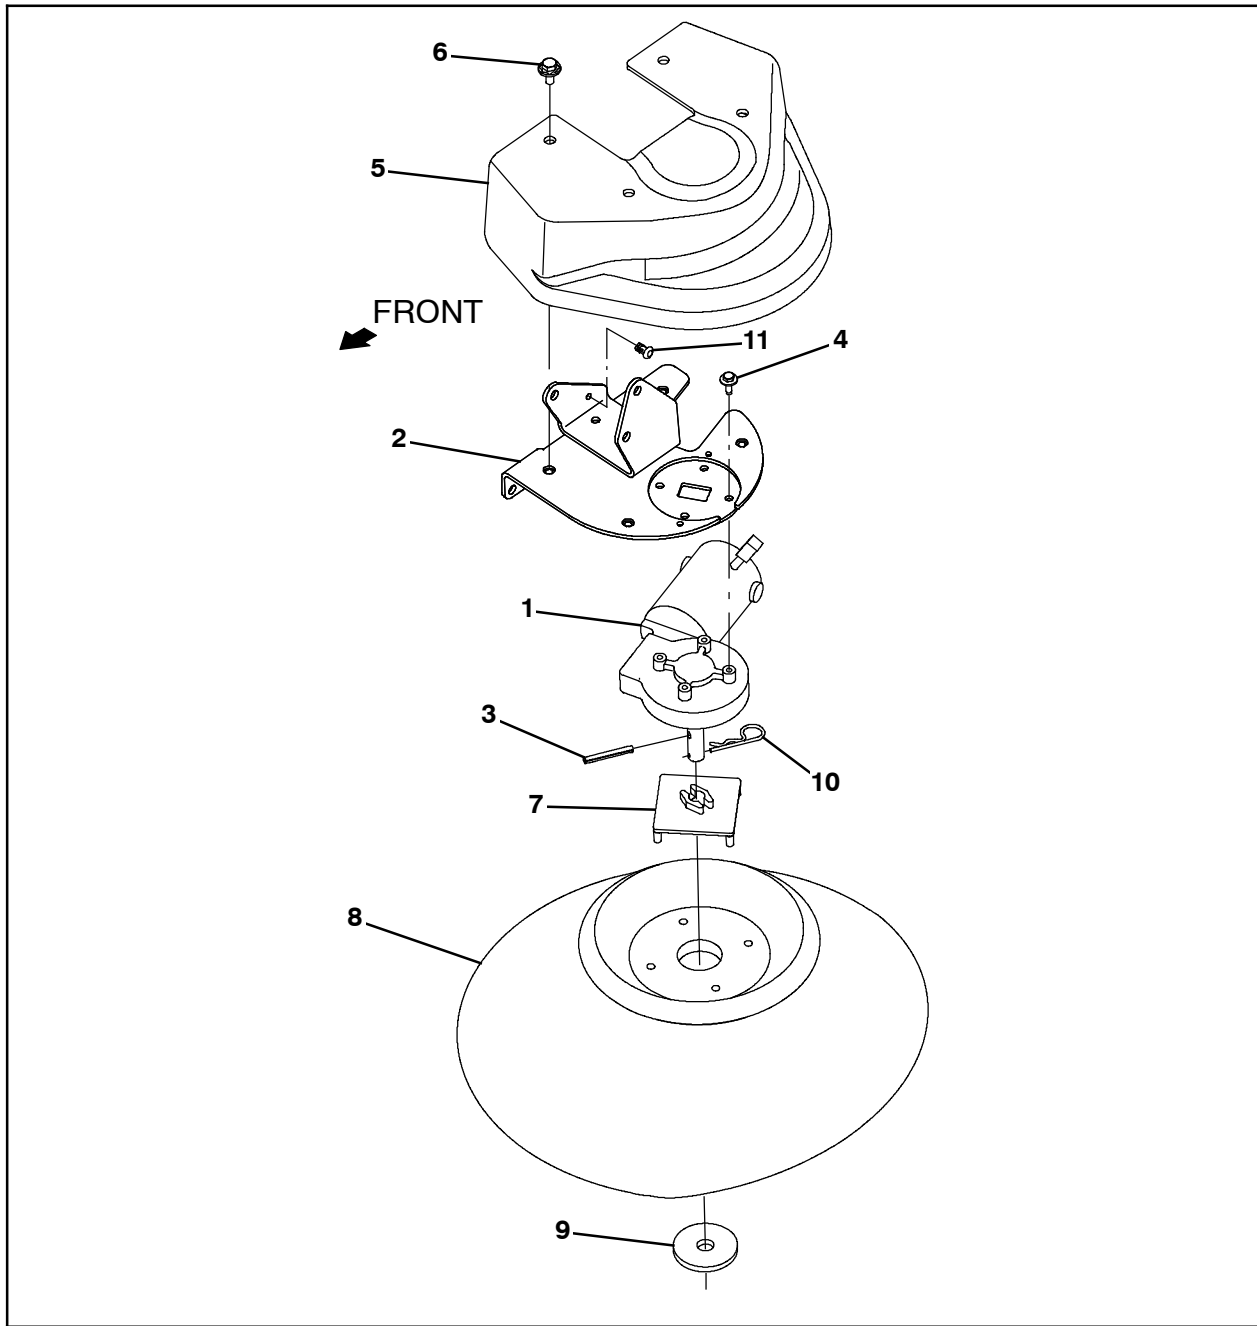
Sweeping Side Brush Drive Motor Group, Left Side
